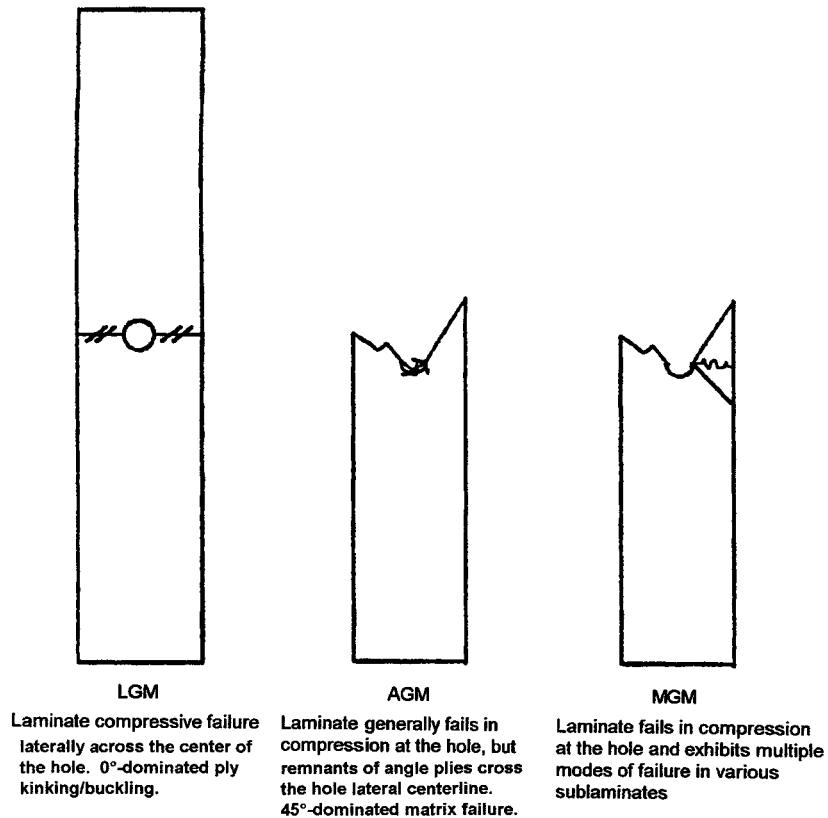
Acceptable Open Hole Compressive Failure Modes
